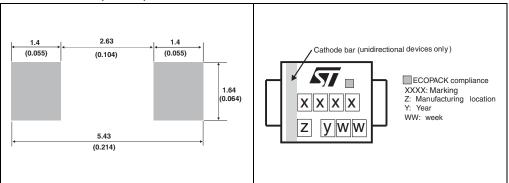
SMA footprint dimensions in Figure 18. Marking layout⁽¹⁾ mm (inches)
